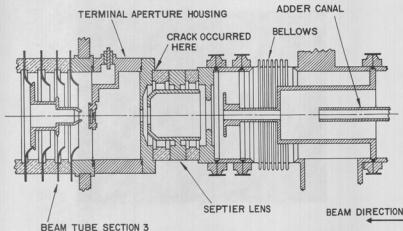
Sectional view of beam tube components in the terminal of the injector.
